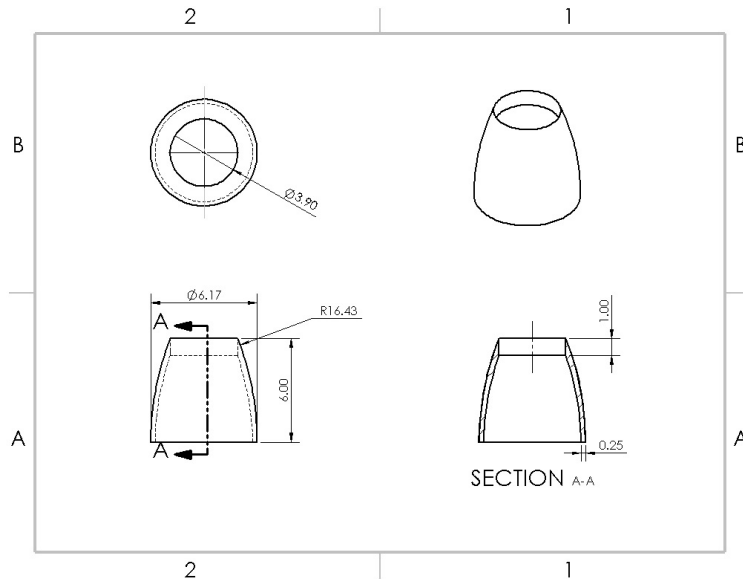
Dimensioned drawing of the 3D printed tailcone.
